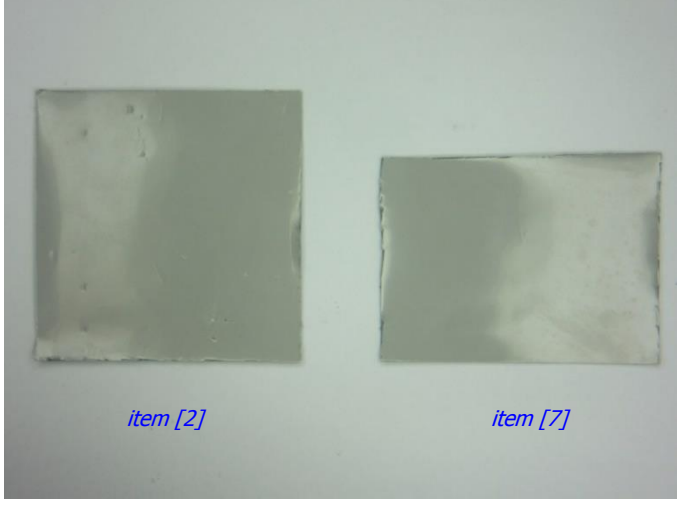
Heat Spreader, Thermal Pad Drawings and Assembly.
